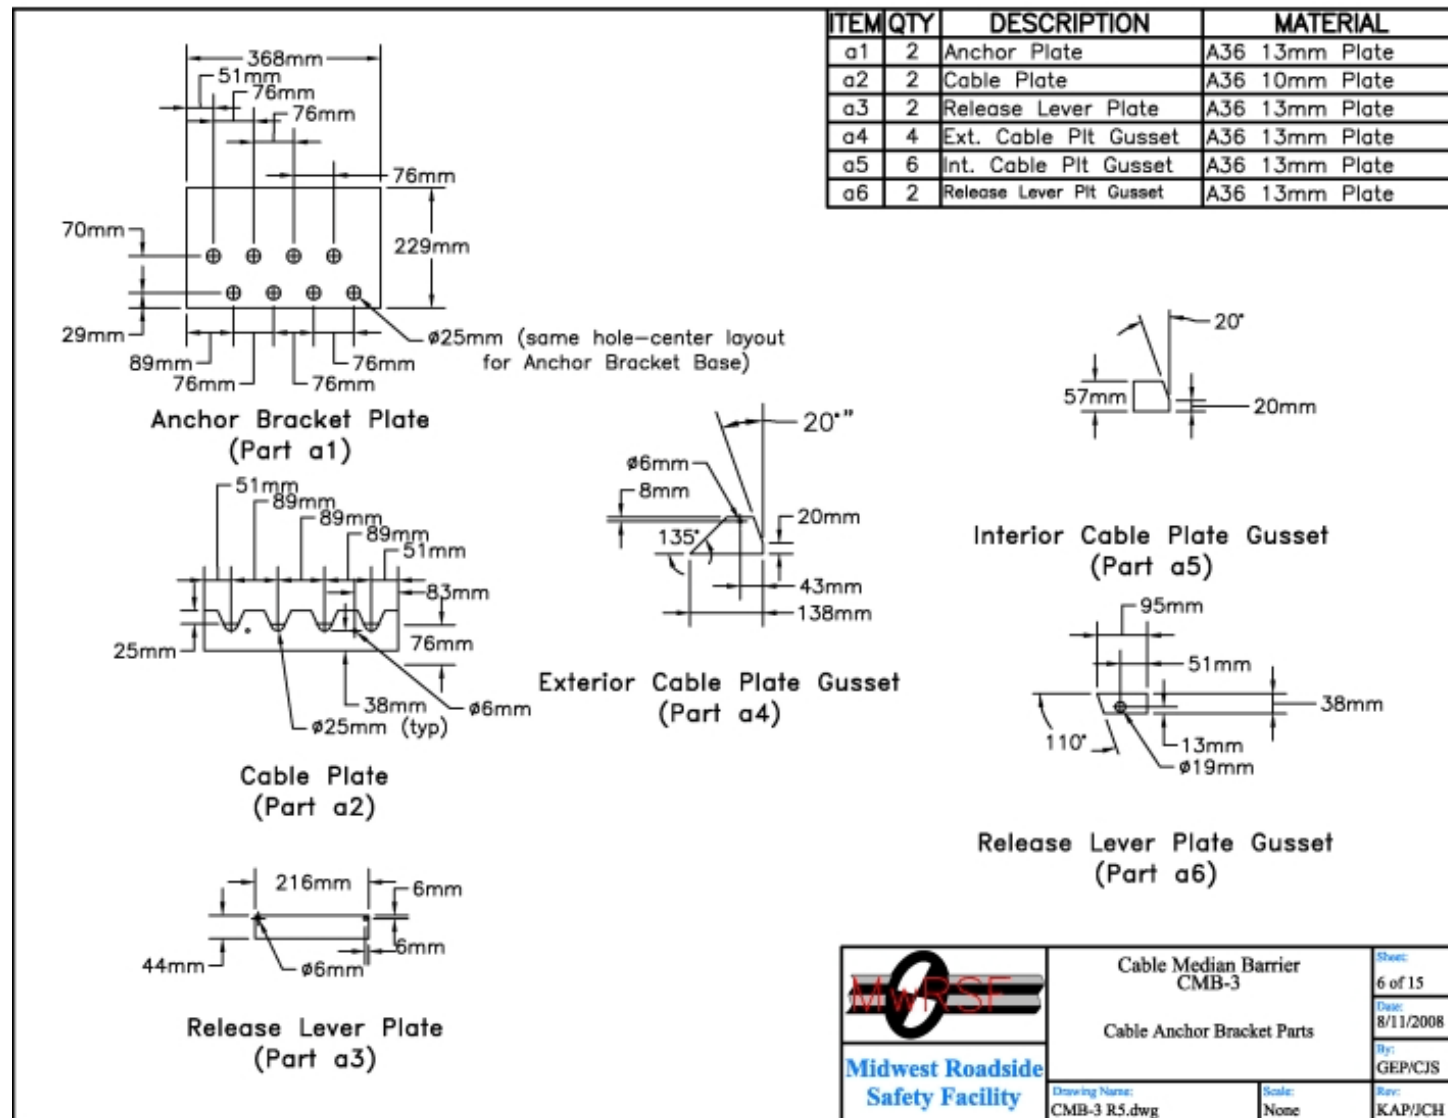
Cable Anchor Bracket Parts (Metric), Design No. 3
